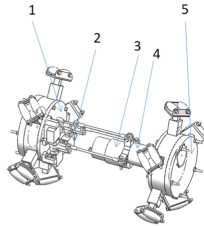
The overall model of the robot. 1-rear unit; 2-steering gear; 3-drive motor; 4-conductive slip ring; 5-front unit
